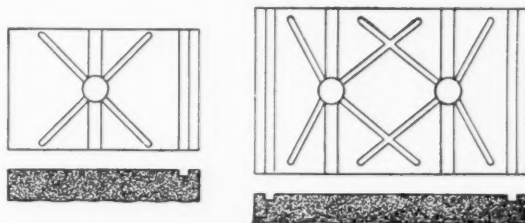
Grooving layout for ring oiled bearings of both single and double ring type. Note that one oil hole per oil ring is provided. The groove at the left end should be omitted for bracket bearings, and when the distance between the ring groove and end of the edge chamfers is less than $\frac{3}{4}$ " both end grooves are omitted.
